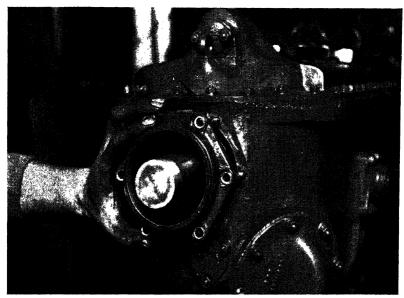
Showing fitting and centralising of front cover (1) (series 1). Front cover should be centralised with the aid of centralising fixture and feelers.
